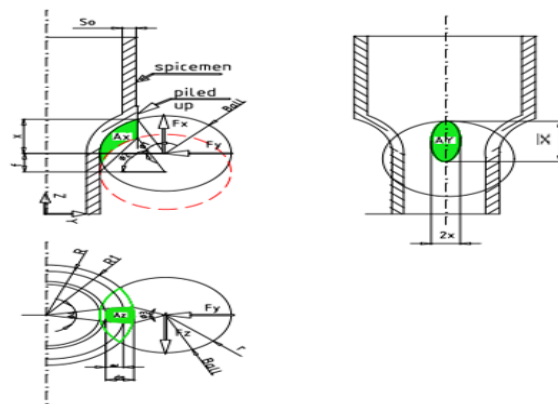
Engineering drawing of projected area for ball impress in specimen
